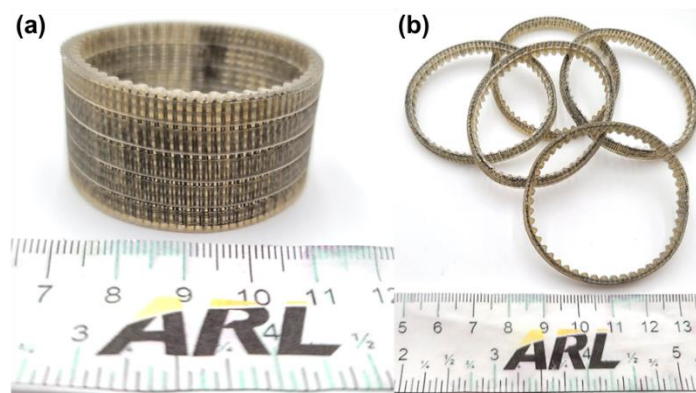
(a) Five-belt stack after removal from mold and flash removed. (b) Five individual belts obtained from the stack, ready for testing or use.
